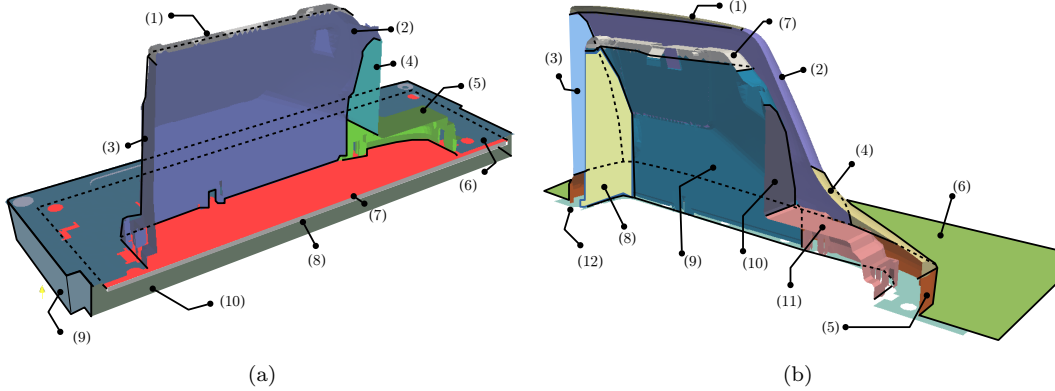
Surfaces definition for the net radiation problem: (a) exchange between PCB and internal surfaces of the shell and (b) exchange between external surfaces of the shell and internal surfaces of the shark cover and roof.
